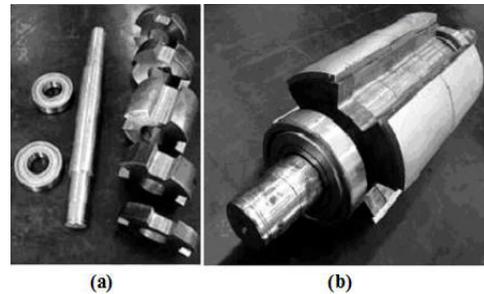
(a) Pieces of rotor core developed (b) rotor developed with magnets fixed.
